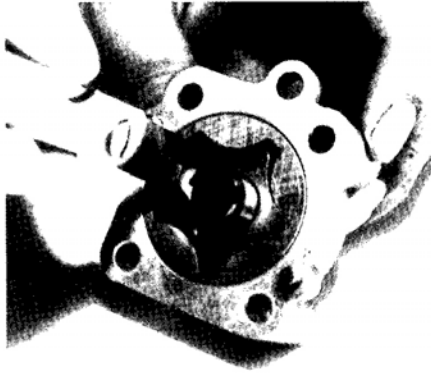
Measure clearance between inner and outer oil pump rotors as shown. Desired clearance is 0.11-0.15 mm (0.0043-0.0059 inch).
